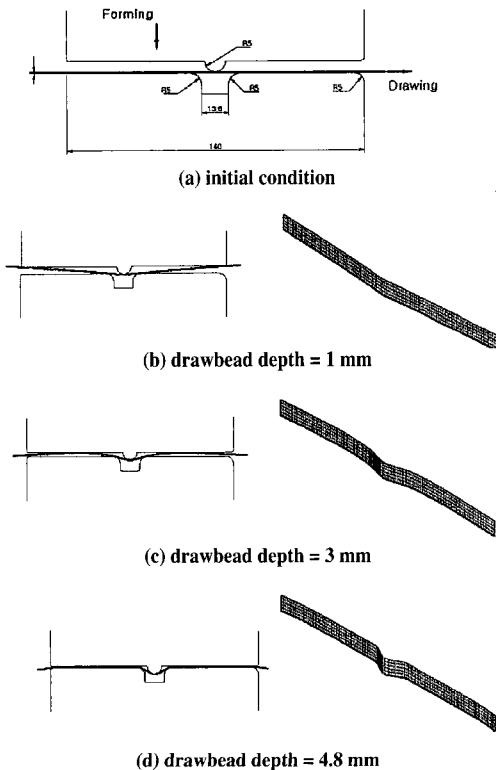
Formed phenomena of 0.8*0.8 welded specimen for each forming depth
